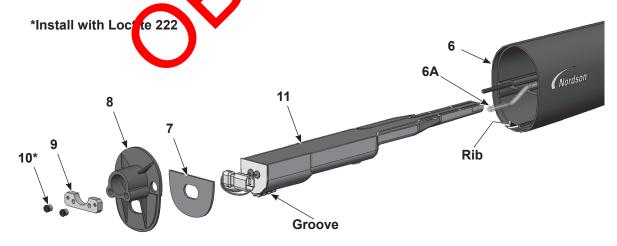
Tube-Mount Gun Disassembly 4 of 5
